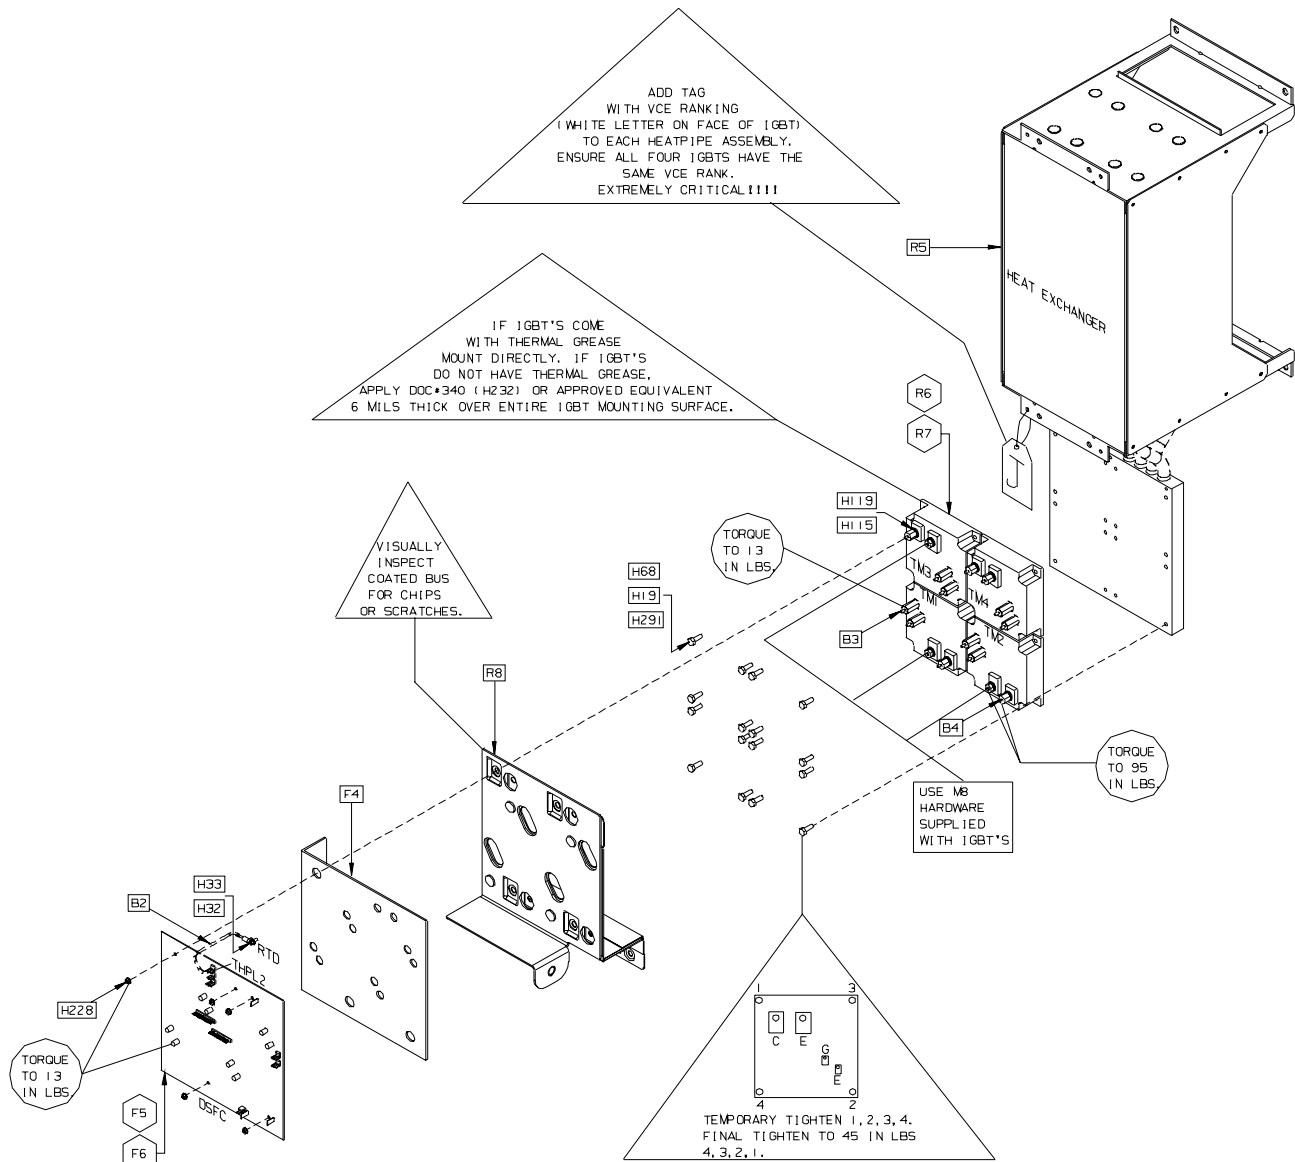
1000 Frame Heat Exchanger Assembly
